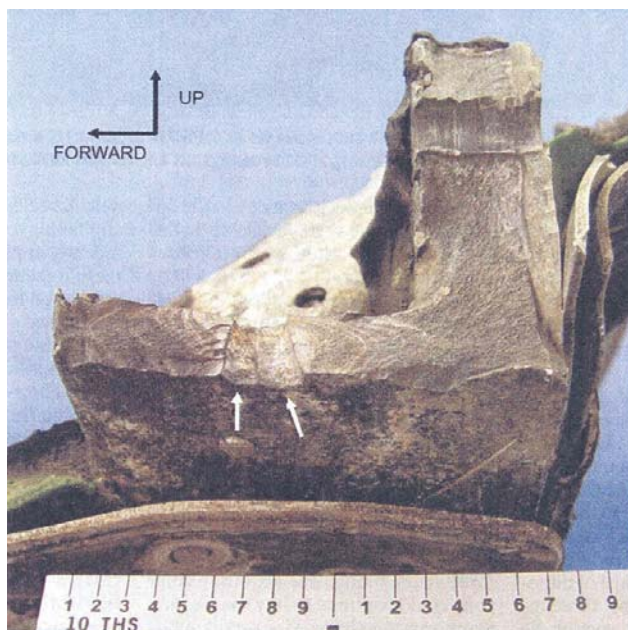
Fracture surface of the lower wing spar in the Grumman Mallard seaplane.
